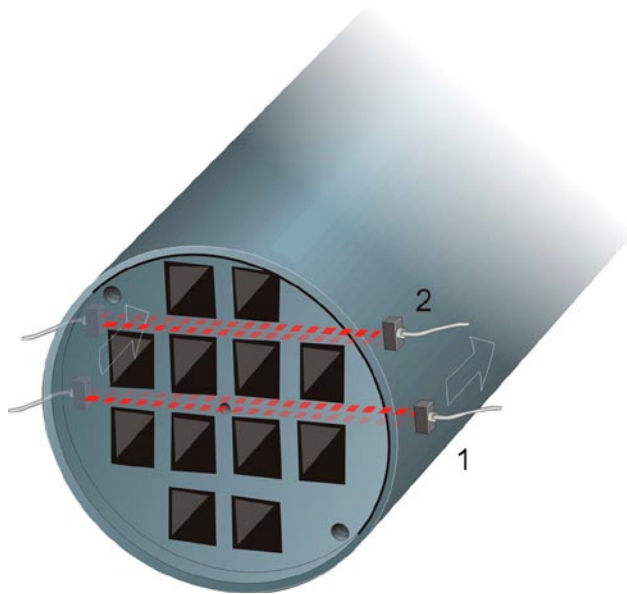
Transmission inspection using contact technique; 1 – centre inspection, 2 – off-centre inspection.
